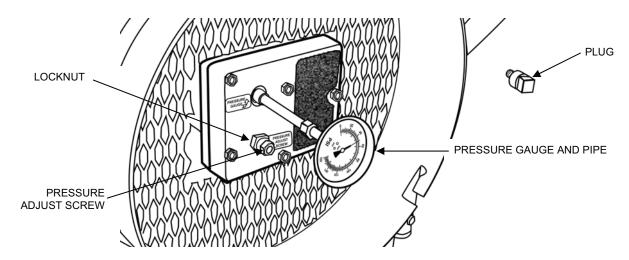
Diesel Heater Air Pump Pressure Adjustment.
